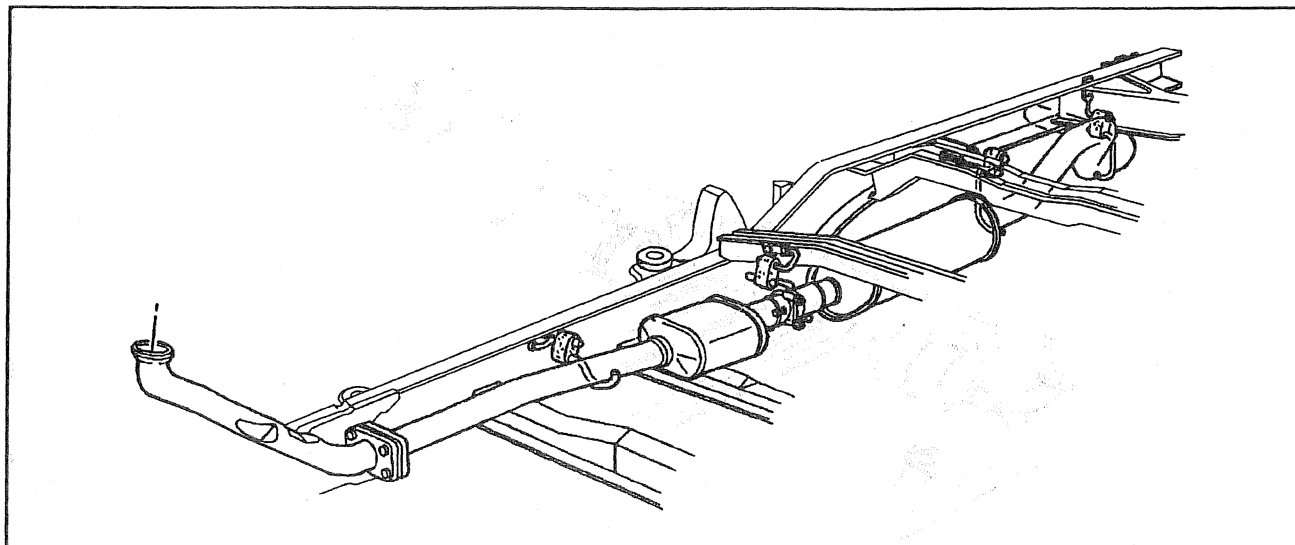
Exhaust System - C/K 2, 3 Pickup and Cab Chassis (Model 310 w/L65)
